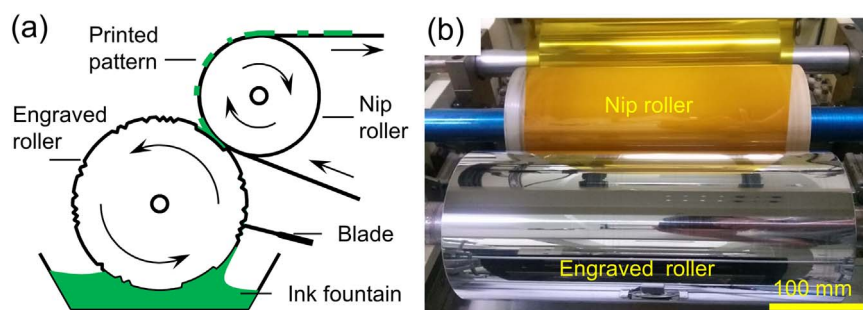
R2R gravure printer: (a) schematic drawing; (b) custom-made machine.
